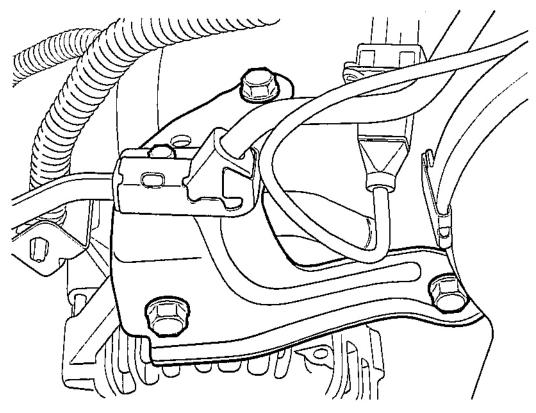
Removing The Throttle Cable Bracket Courtesy of SUZUKI OF AMERICA CORP.
